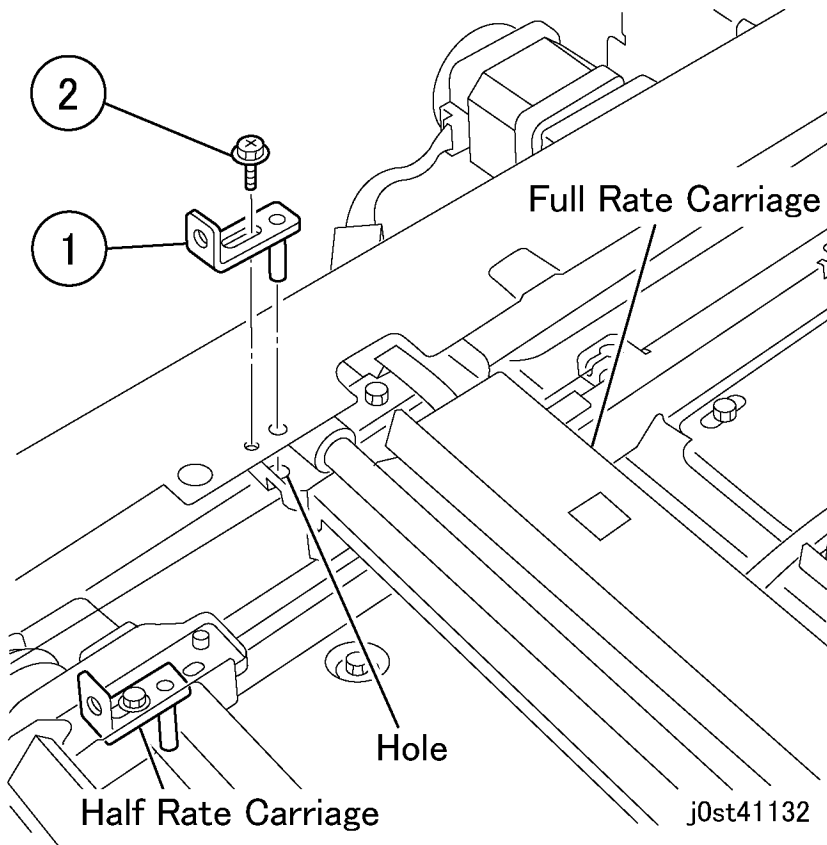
Position Adjustment of Full Rate Carriage 1/2 (j0st41132)
